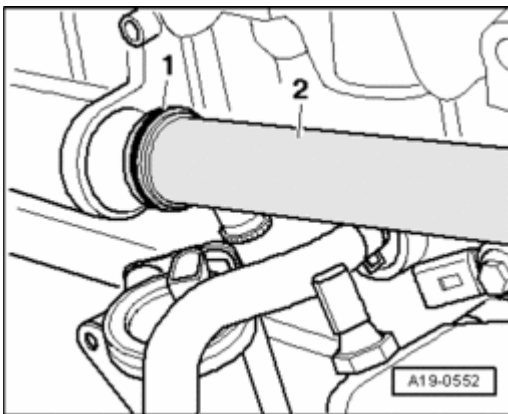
Lubricating New O-Ring With "G 12+" And Pushing Onto Coolant Pipe
